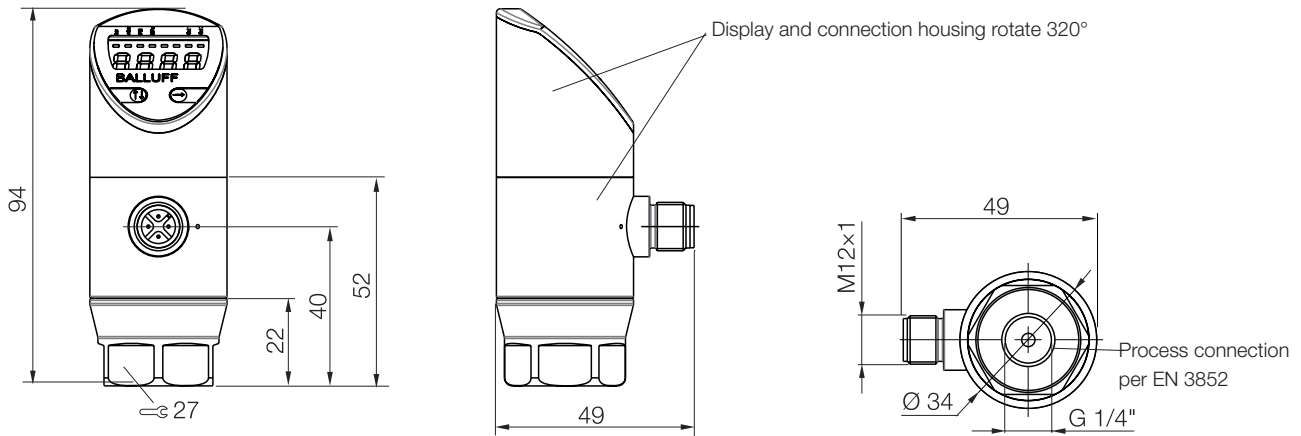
Dimensioned drawing of standard and high-end pressure sensors, not flush-mounted
